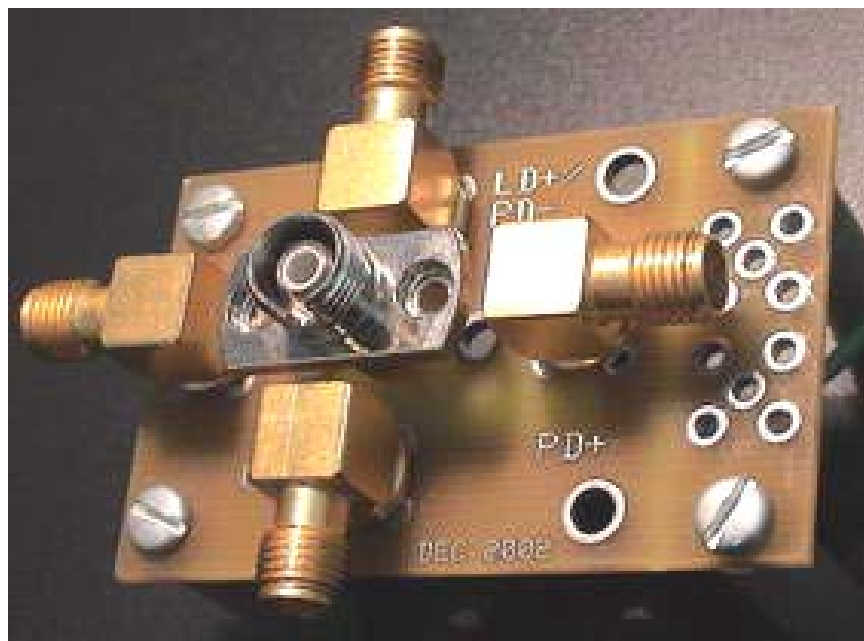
The fabricated 622 Mbit/s laser diode mounted on the printed circuit board.
